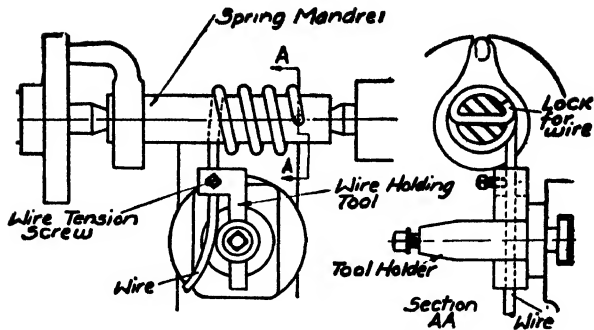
Winding a Helical Compression Spring on an Engine Lathe.
